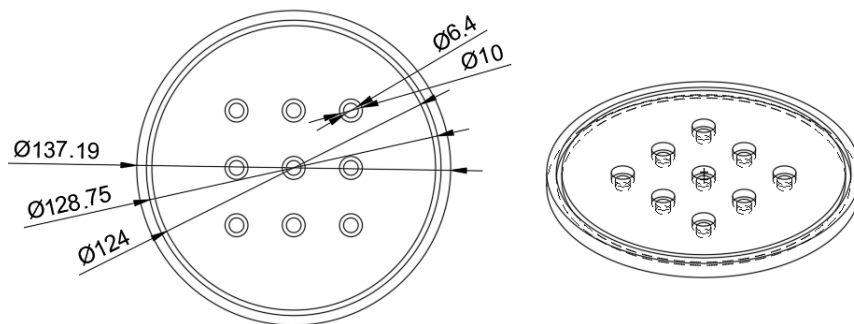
Technical drawing of the bottom (fixed) section of the board mount with circular slot along its inner circumference. This piece is fixed to the topmost spacer using 1/4"-20 screws. All dimensions are given in millimeters.
